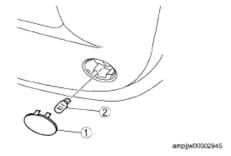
Identifying Courtesy Light Bulb & Lens Courtesy of MAZDA MOTORS CORP.
